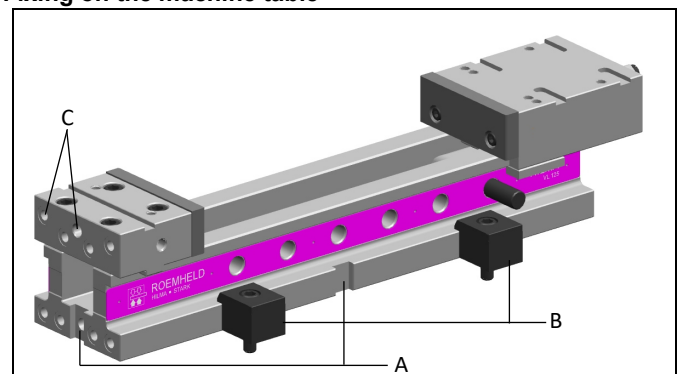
Assembly types for series HILMA.NC(H) with reference keyway (A), clamping claw (B), drilling pattern on the face (C, on request, for vertical mounting)
